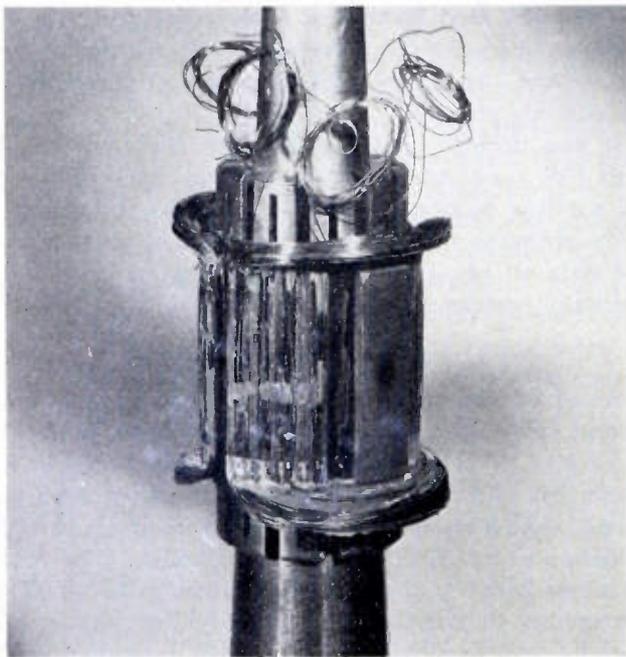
Horizontal coils and half-cylinder-mounts assembled on inner cylinder.
